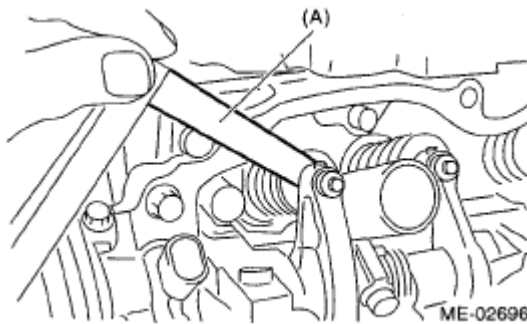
Measuring Exhaust Valve Clearances Using Thickness Gauge
